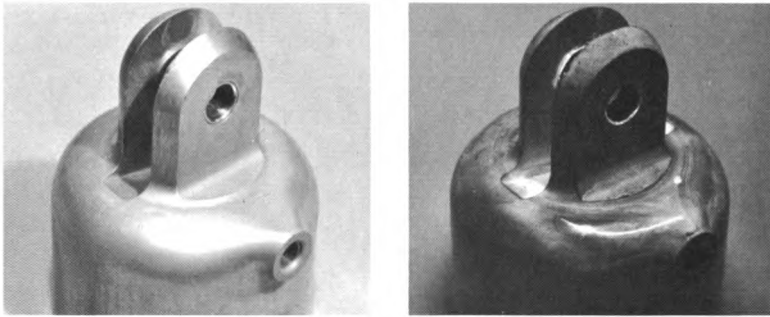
An aluminum helicopter-landing-gear part after penetrant inspection. On the left is a white-light view of the part. On the right is a black-light view of the same part shown at left after fluorescent-penetrant inspection. The fluorescing crack is easily visible.
